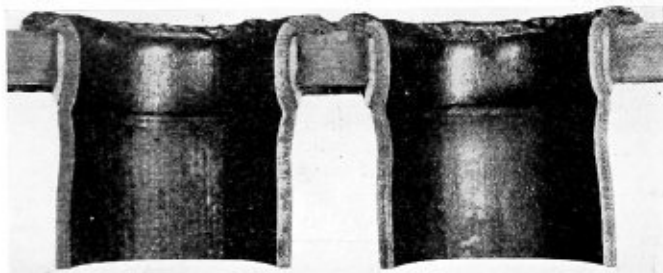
Section of Tube Sheet with Charcoal Iron Boiler Tubes Welded in Place
